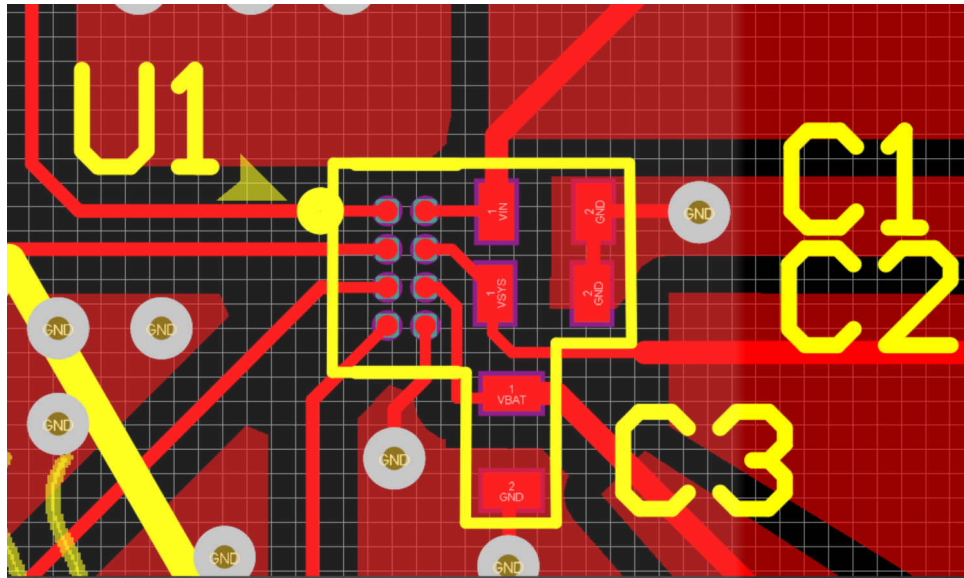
BQ25180 Fanout, 5-mils to 6-mils on Pads
